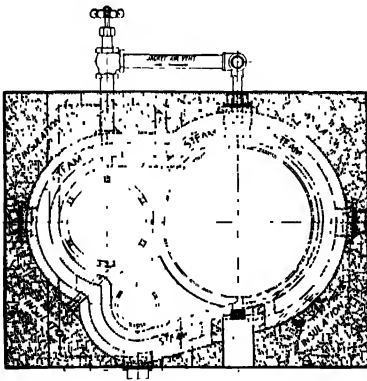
Prosser "High-economy" Engine — Transverse Section through Cylinder.
